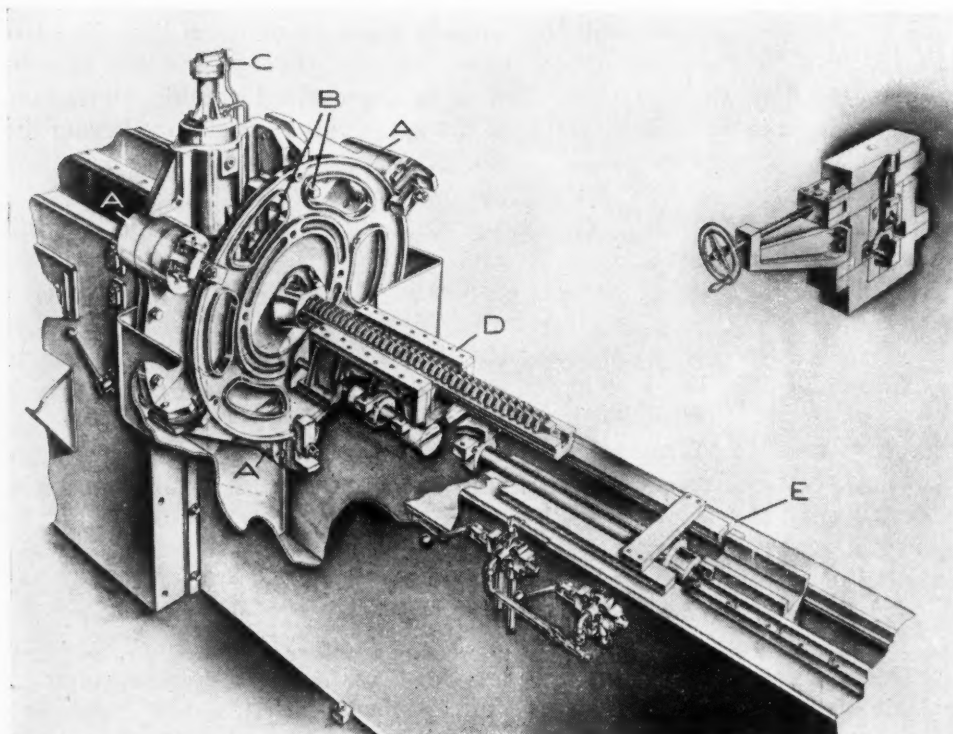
Details of the Locating and Clamping Devices on Broaching Machine. The Small "Insert" Fixture (Right) is Mounted on the Machine for Broaching the Hub Clamp
